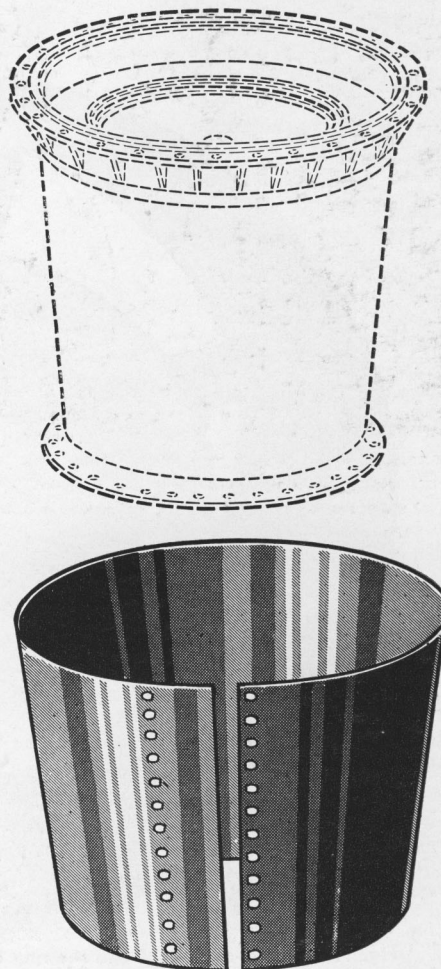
Exhaust-cone assembly and aluminum foil-bronze mesh insulation pad of the GE I-40 turbojet engine.
